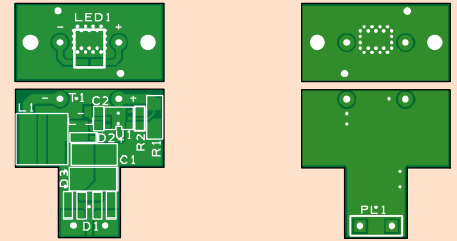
The printed circuit board design comprises two parts. Because of space constraints D1a through D1d are indicated with a single 'D1'.
